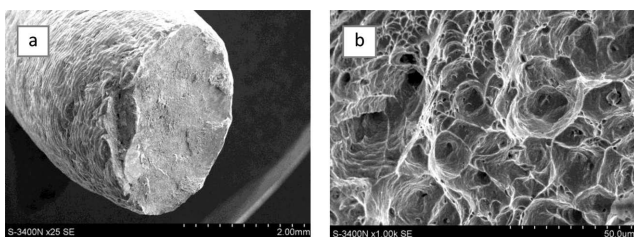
Steel 2 after dynamic tensile tests, a) view of the surface of the sample, b) ductile fracture surface with a deep crater structure
